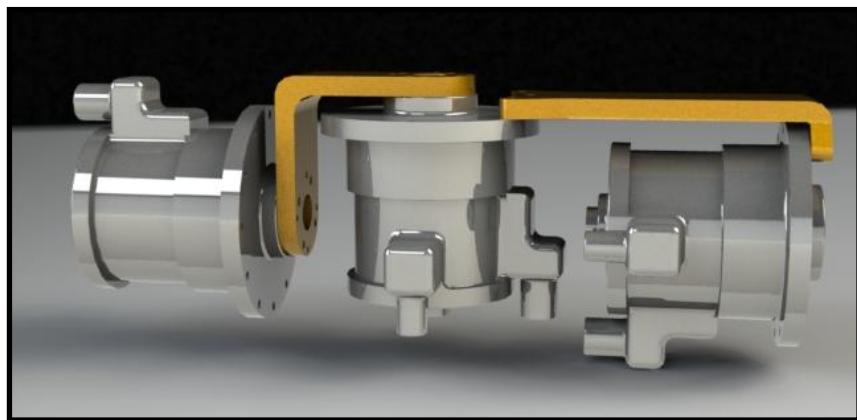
A CAD of concept B1 - shaft-shaft, body-body.
